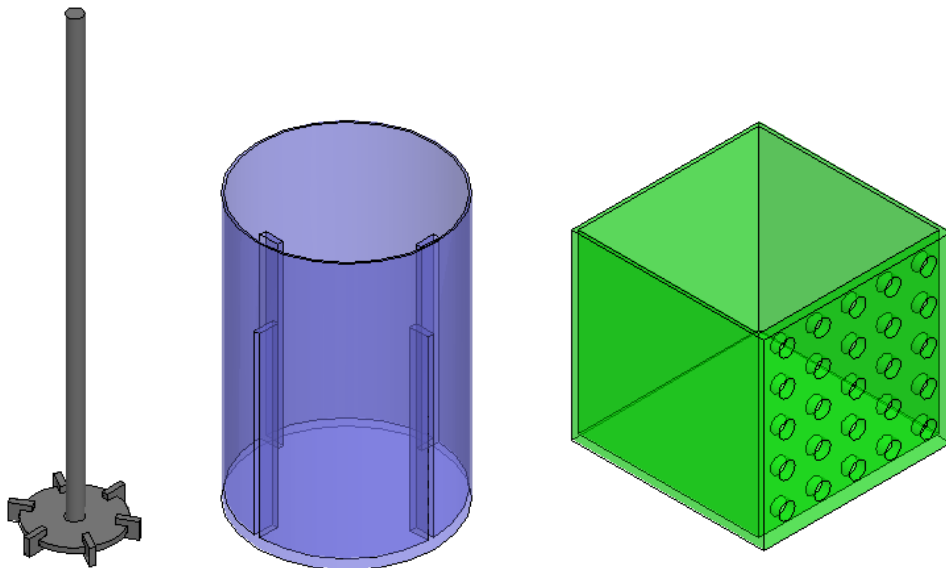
The Parts of the Tank Set-up: Rushton turbine with the shaft, cylindrical tank with baffles, square tank with holes (from left to right)
